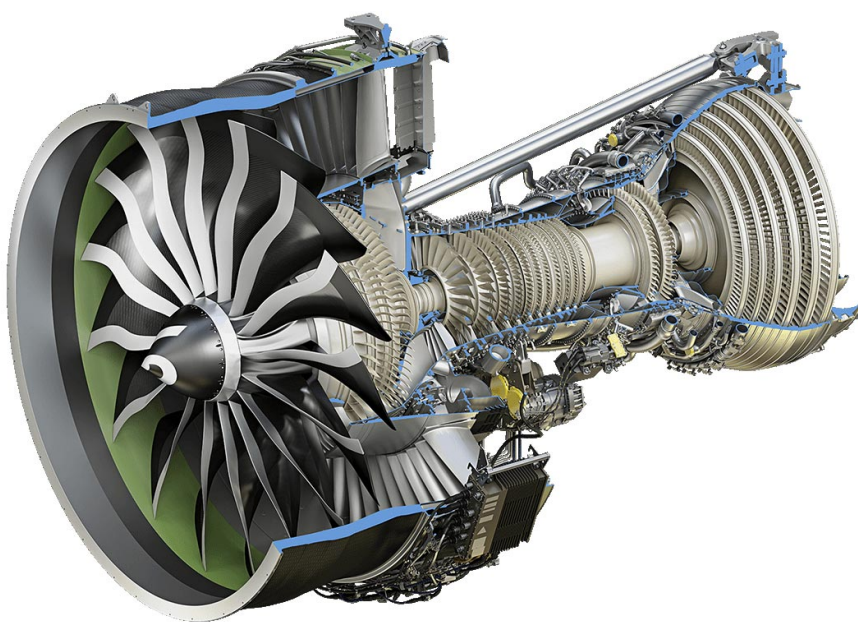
General Electric GE9X Cutaway Drawing [1].
